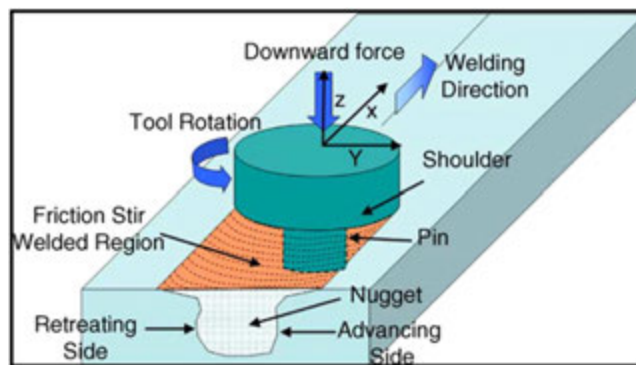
Schematic drawing of friction stir welding. Reproduced from Mishra, R.S. and Ma, Z.Y., 2005. Friction stir welding and processing Materials Science and Engineering: R 50 (1–2), 1–78.
